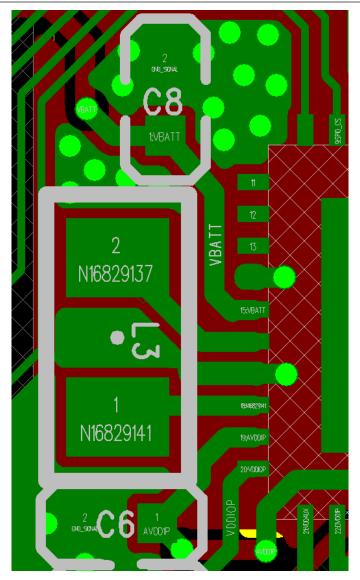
Switcher Inductor Layout Recommendation for 2-layer ATMx20x PCB with Single-sided SMD Components
